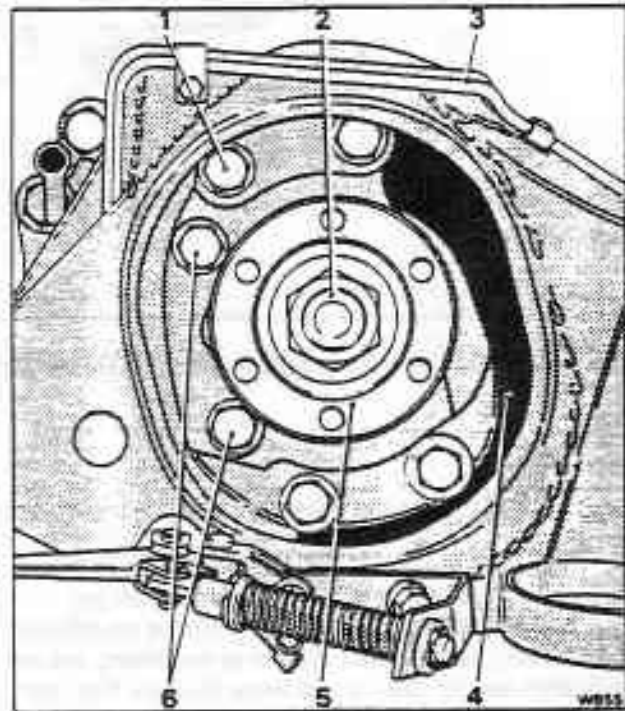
Rear hub and brake caliper mounting (cars fitted with constant velocity joints)
